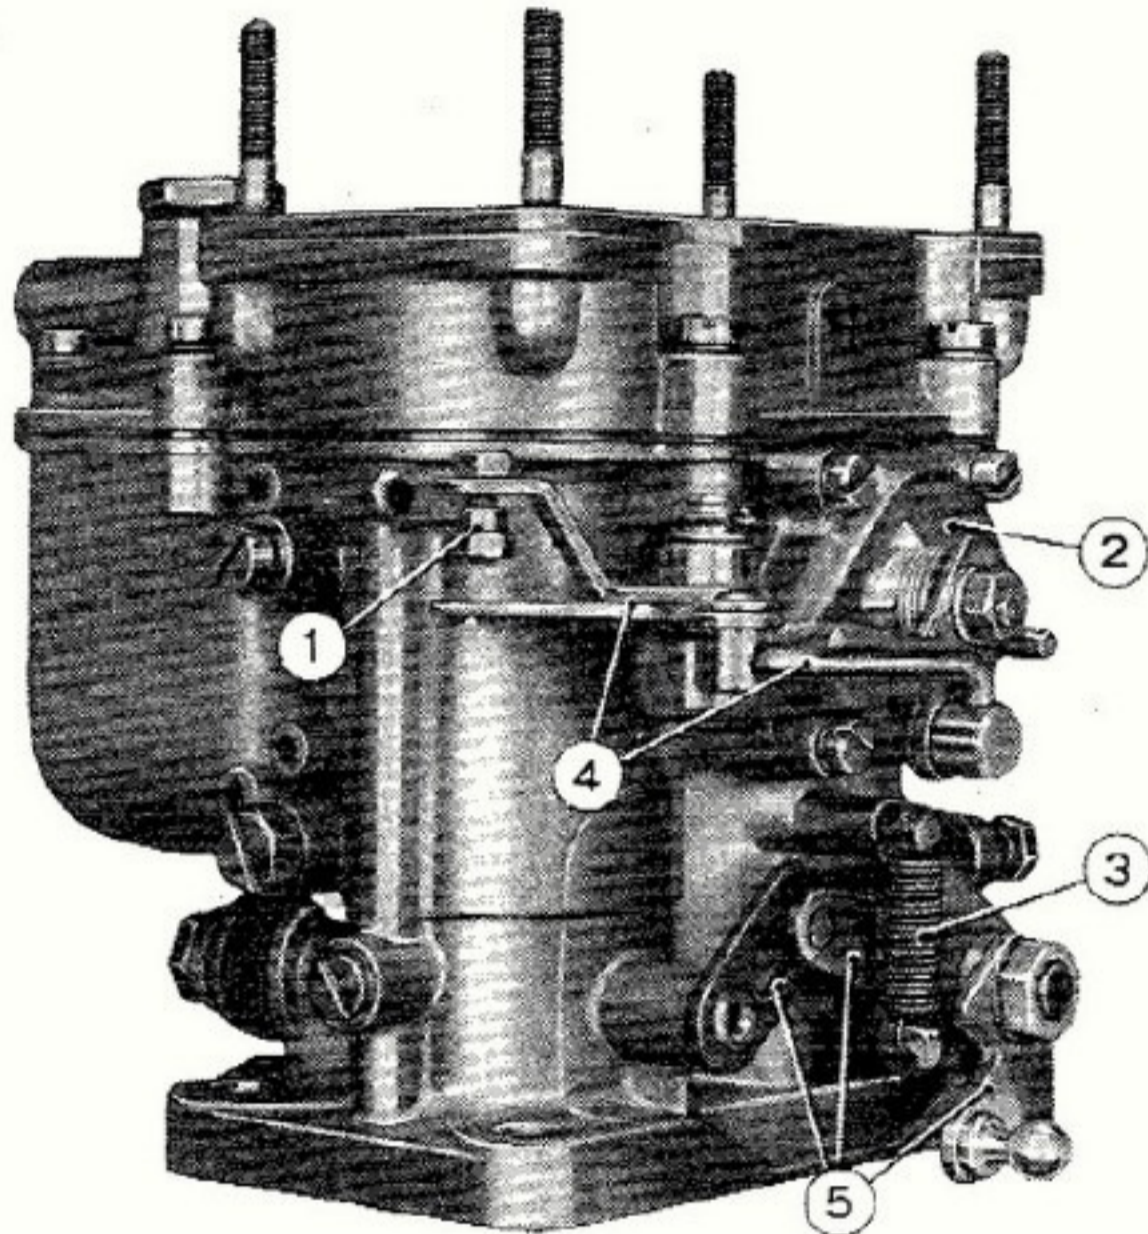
Weber 28/36 DCD 12 carburetor.
